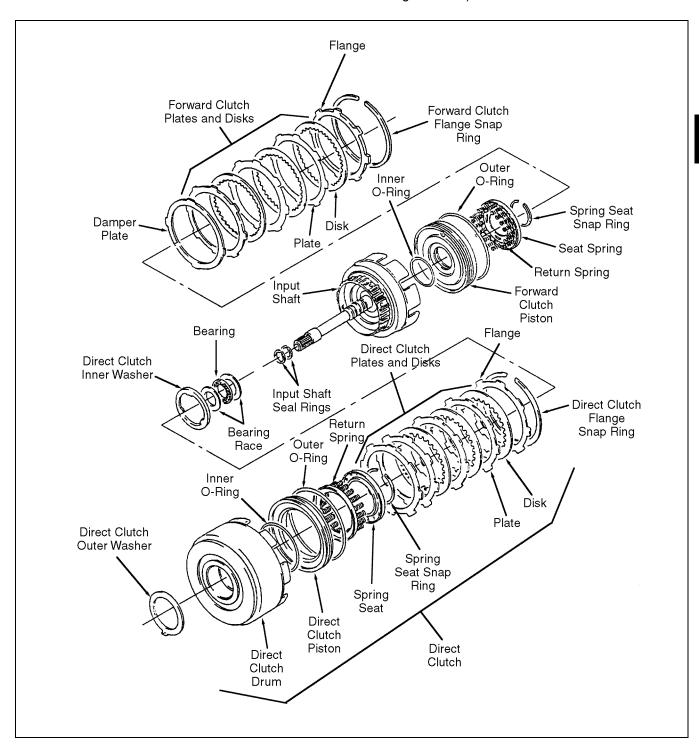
J-12. Direct Clutch, Forward Clutch and Input Shaft Disassembly
